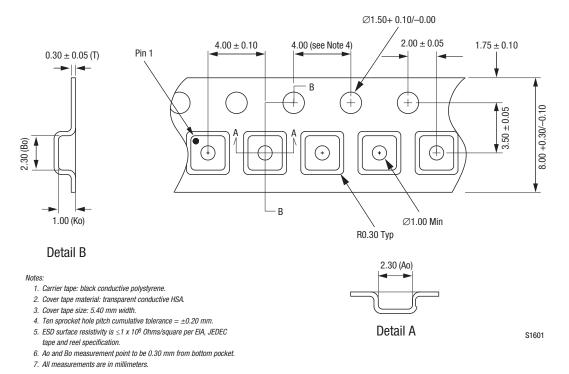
SKY65095-360LF Tape and Reel Dimensions
